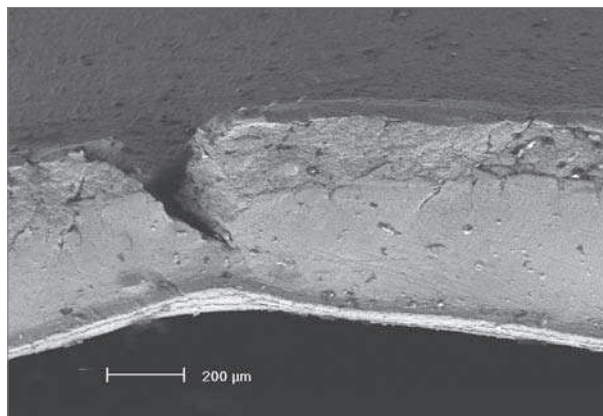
Cracks on test piece's flange at the hole enlarged by 28% in HE test
